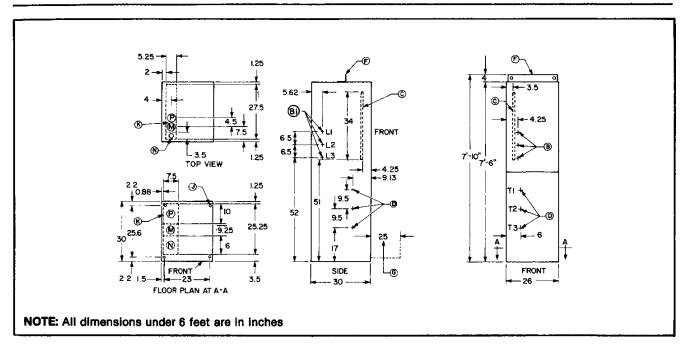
Dimensions, one-high enclosure (400 amperes and below).
